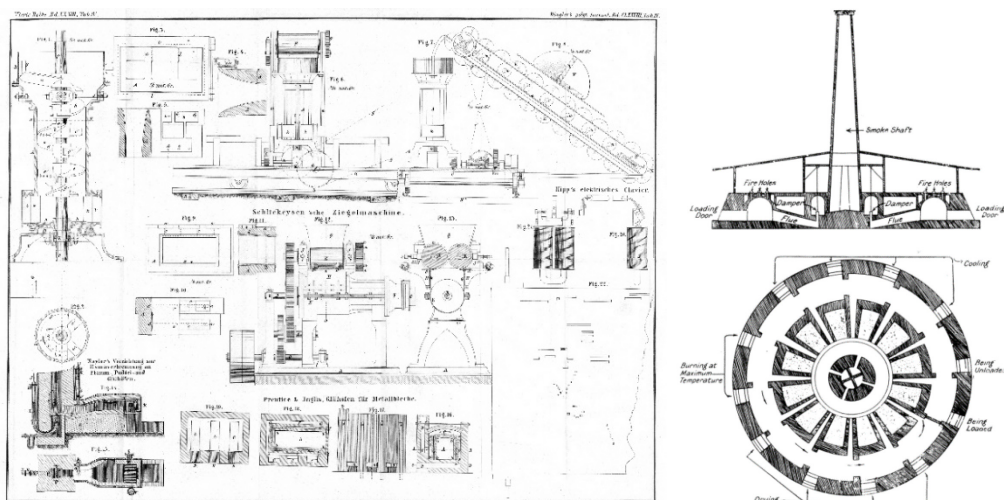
Industrialisation of brickmaking: (left) Schlickeysen press; (right) sectional elevation and plan of a Hoffmann kiln.
